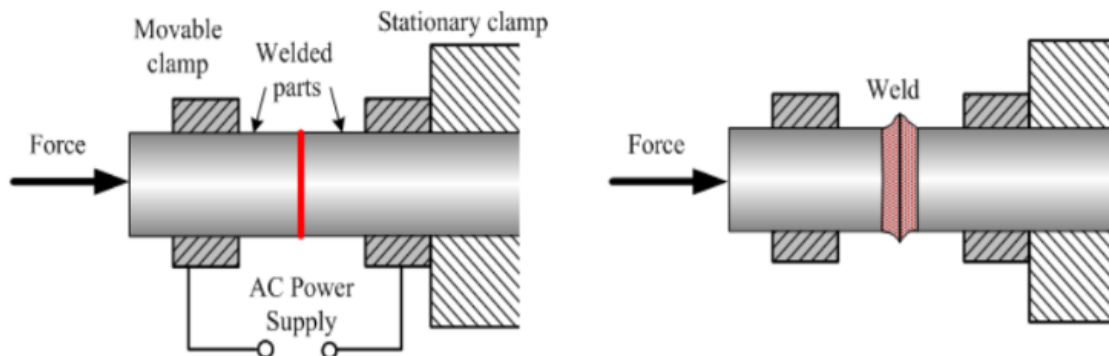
Schematic of the Rail Flash Butt Welding Process [6].
